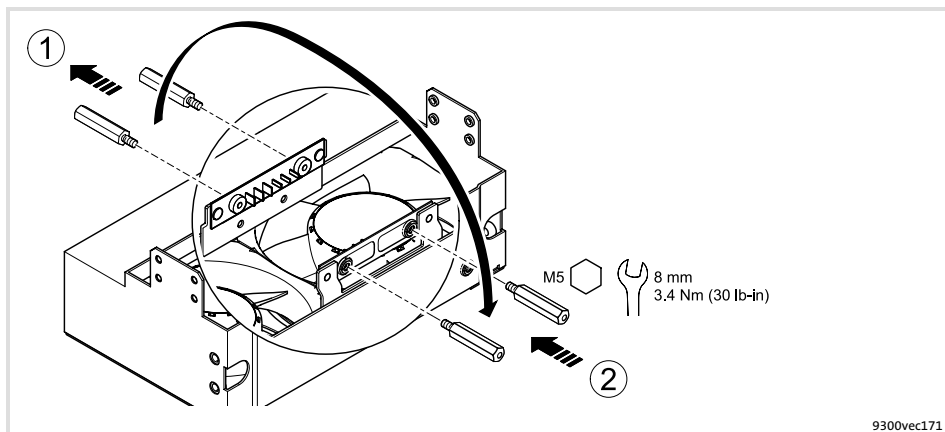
Modifying the threaded sleeves for the voltage supply of the fans
